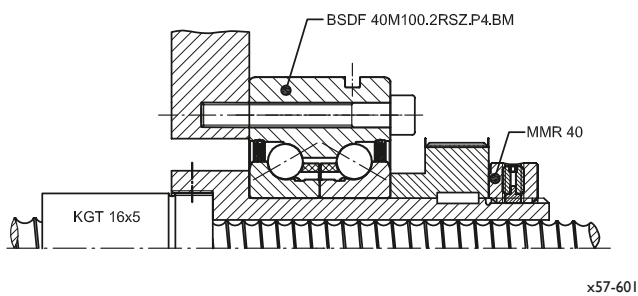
Bearing of driven ball screw nut 16 x 5 via adapter and double-row precision ball screw support bearing BSDF 40M100.2RSZ.P4.BM preloaded with a precision locknut MMR 40
